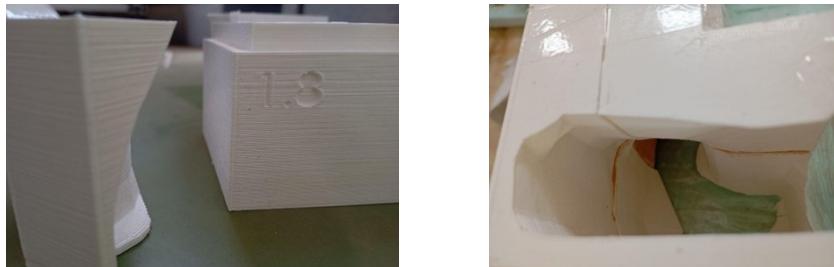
Assembly and Preparation Procedure. (left) mold pieces with number engravings (right) the assembled pieces
